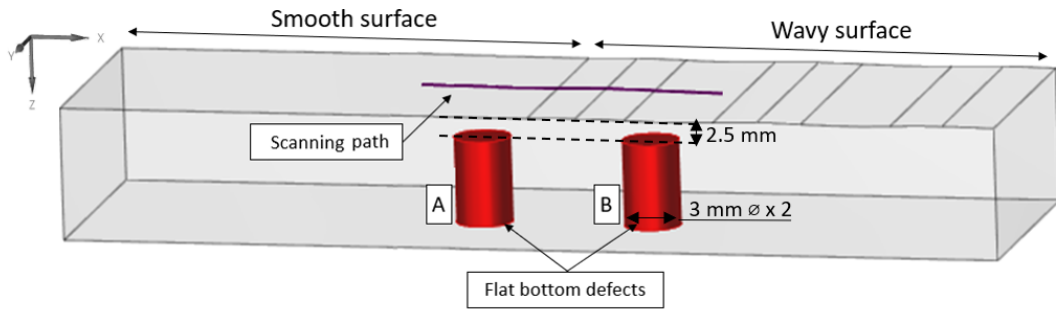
UT inspection model used with two 3 mm diameter flat bottom holes, 2.5 mm under the top surface.
